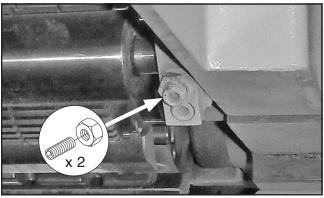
Location of idler roller height adjustment screw (1 of 2).
